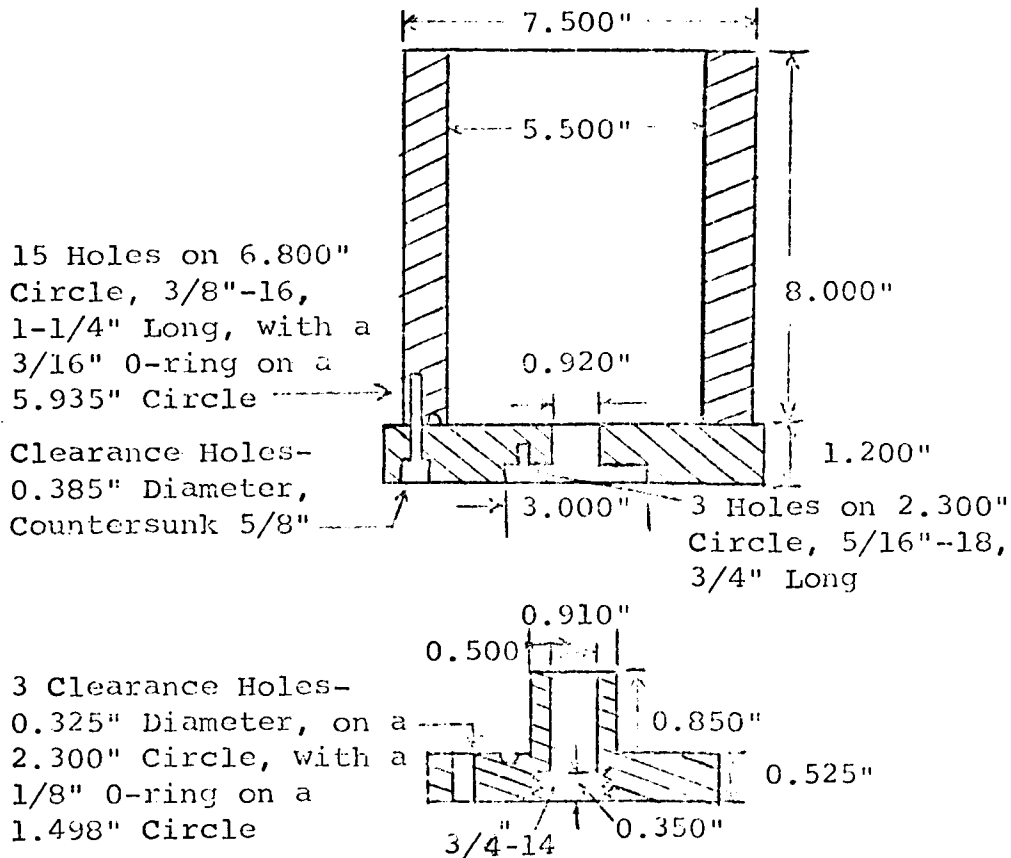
Rheometer Base and Shell (1/4 Size) and Universal Die Mount (1/2 Size)
